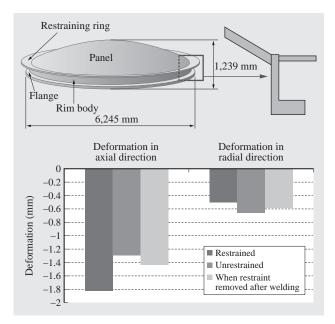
Example of Welding Distortion in Large Structure. It is possible to reduce the work associated with attaching the large welding jig used to reduce welding distortion.
